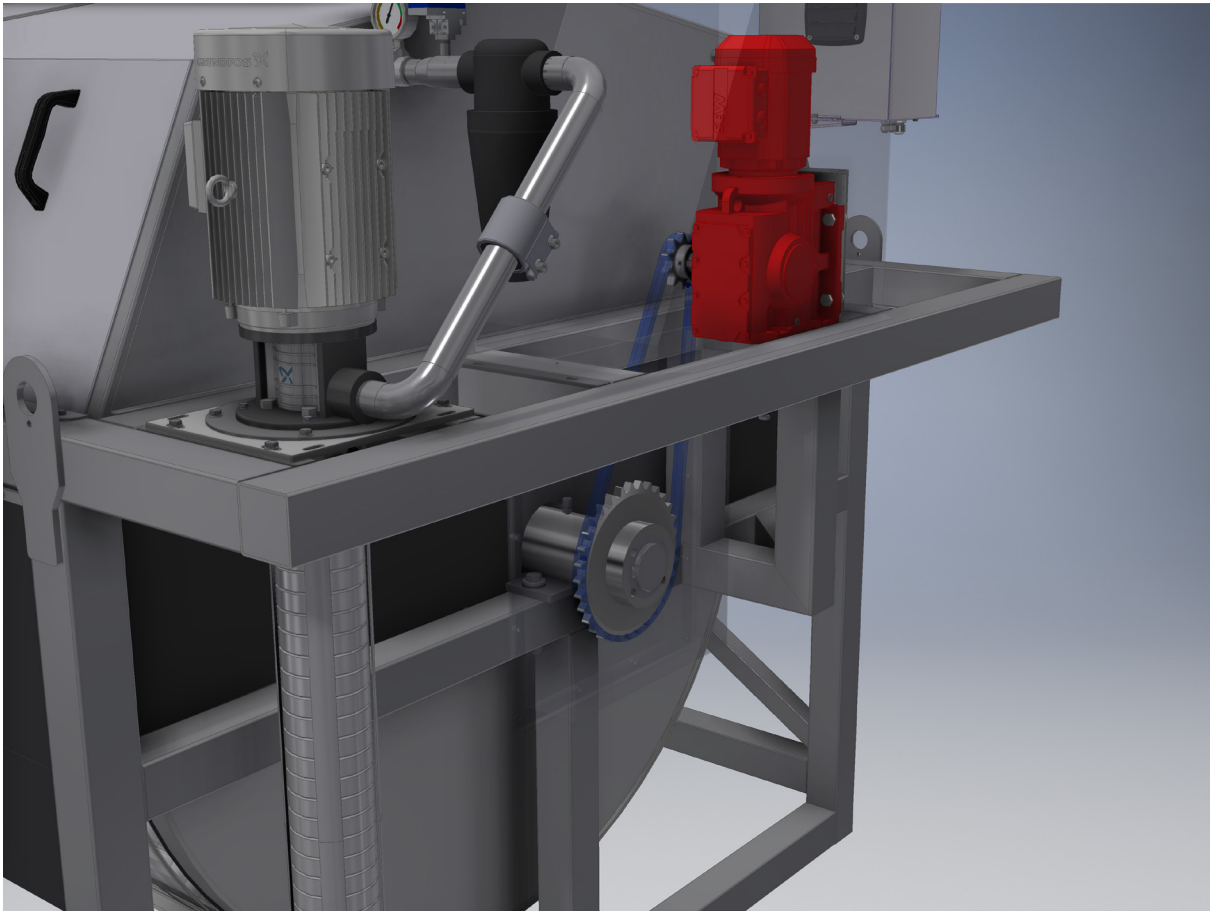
Drive assembly prior to upgrade, with steel chain.
